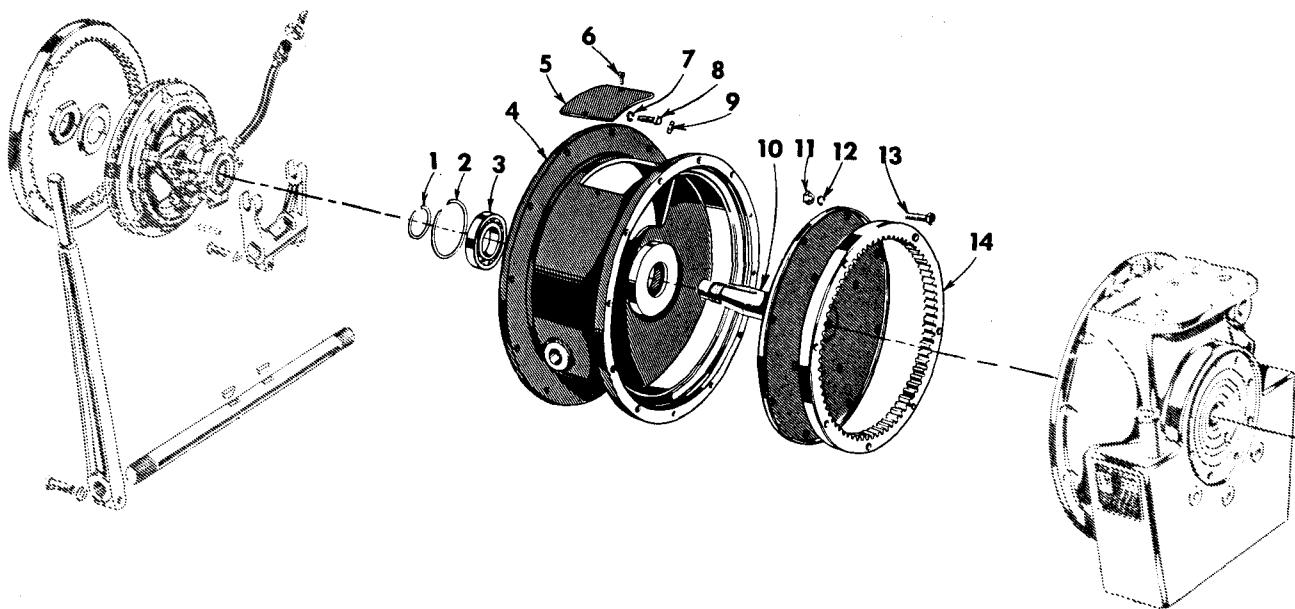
SERIES MANUAL INPUT DISCONNECT CLUTCH HOUSING OPTIONS AND DRIVE RING OPTIONS, EXPLODED VIEW
